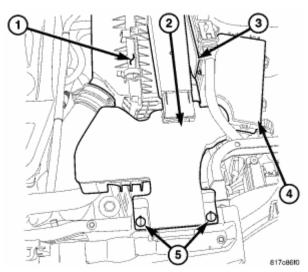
Air Cleaner Housing Assembly Courtesy of CHRYSLER LLC
